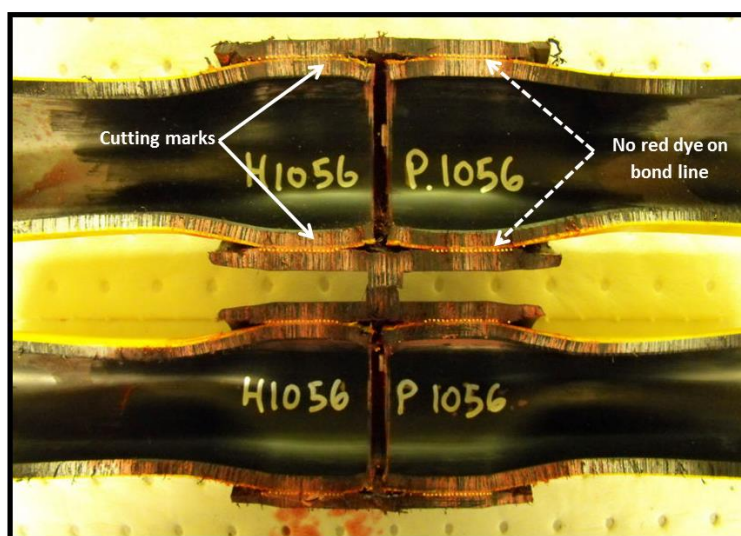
Sectioned view of crash tested electrofusion welded hydrogen PE pipe following hydrostatic testing
